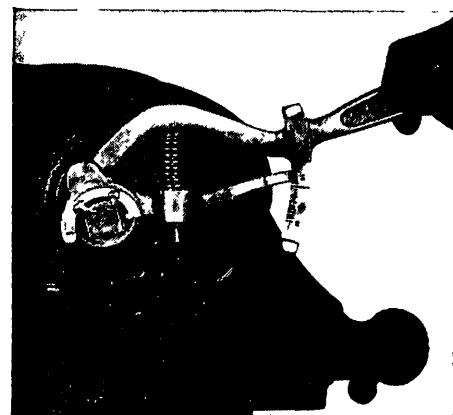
Using scale and wrench to check pinion bearing pre-load, 1935-52
